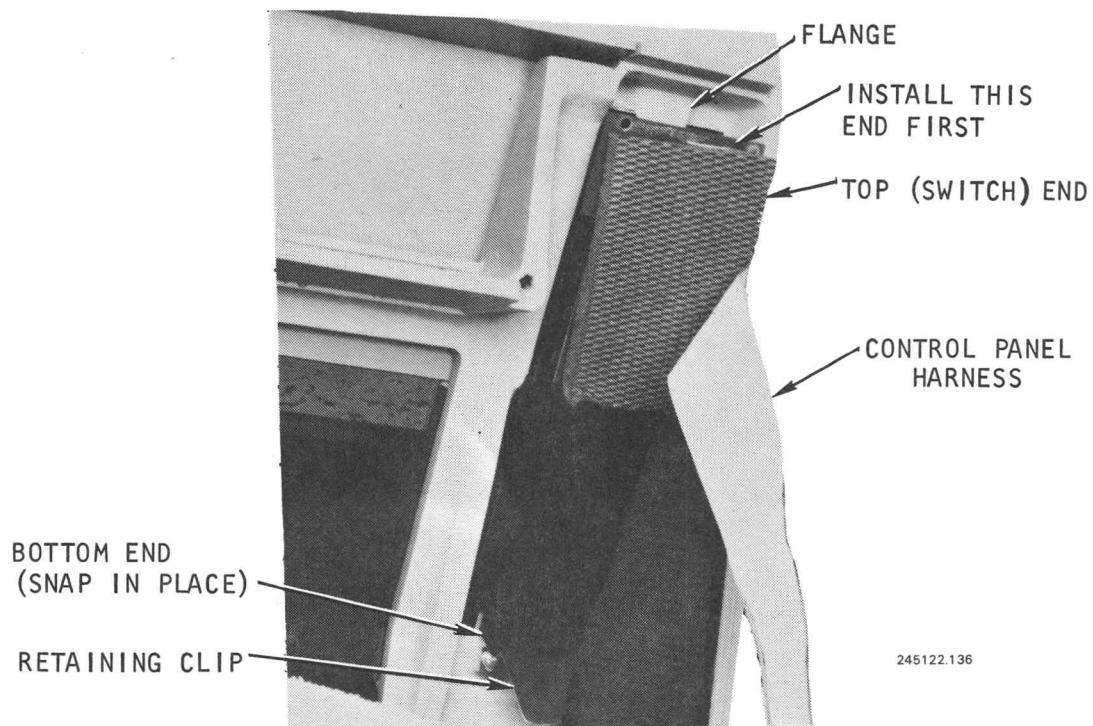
C. Top Cover Removal/Replacement Control Panel Mounting Details (Viewed From Inside of Top Cover).
